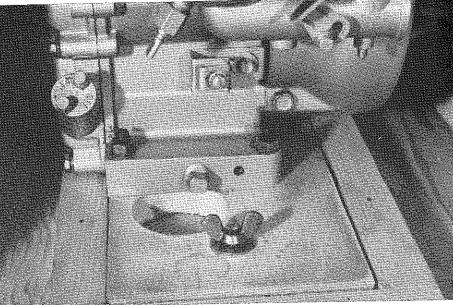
Permanent base board illustrating oil drain hole and wing nut and bolt used to lock engine to base of storage unit.
